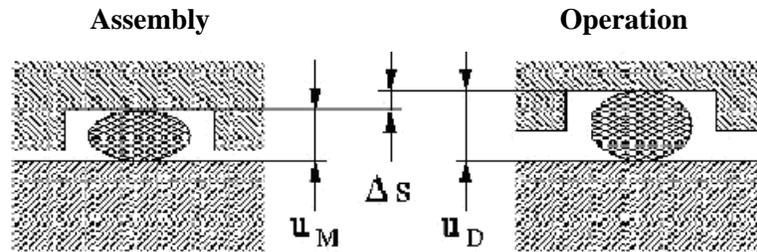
Distance between the sealing surfaces during assembly and under stress (at the position of the gasket rings)
